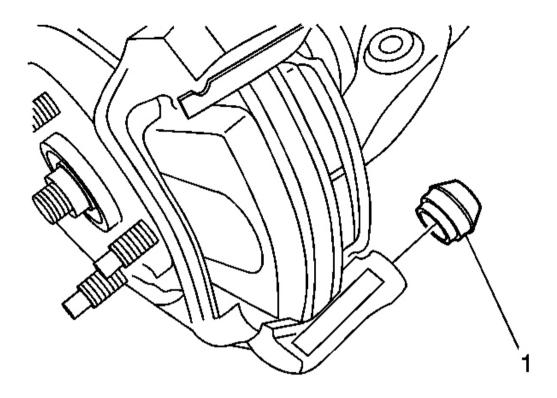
Removing/Installing Caliper Guide Pin Boots From Caliper Bracket Courtesy of GENERAL MOTORS CORP.
